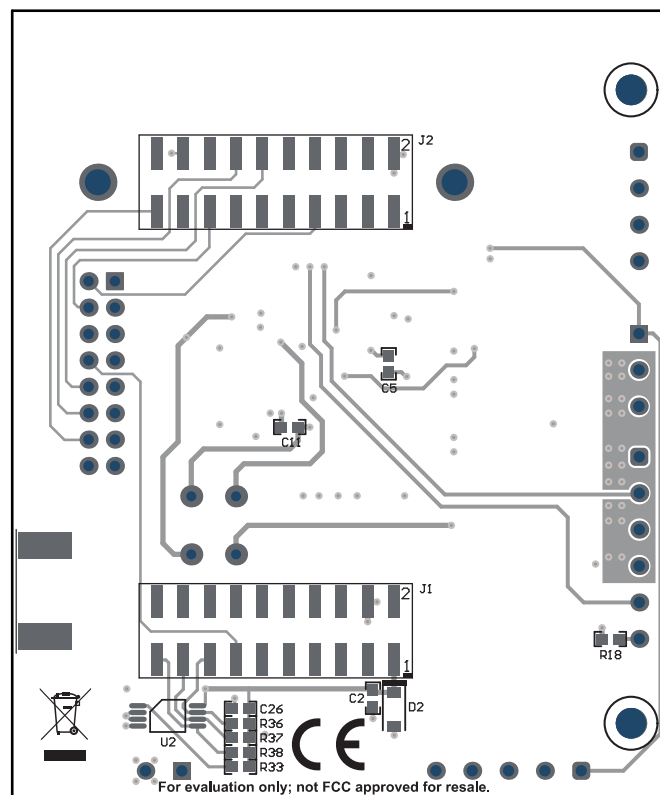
ADS124S18EVM PCB Layout - Bottom Layer
